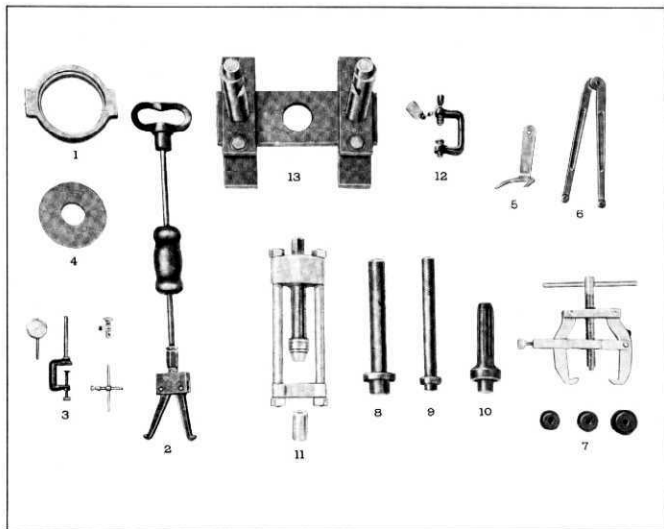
Rear Axle, Propeller Shaft and Rear Spring Tools
